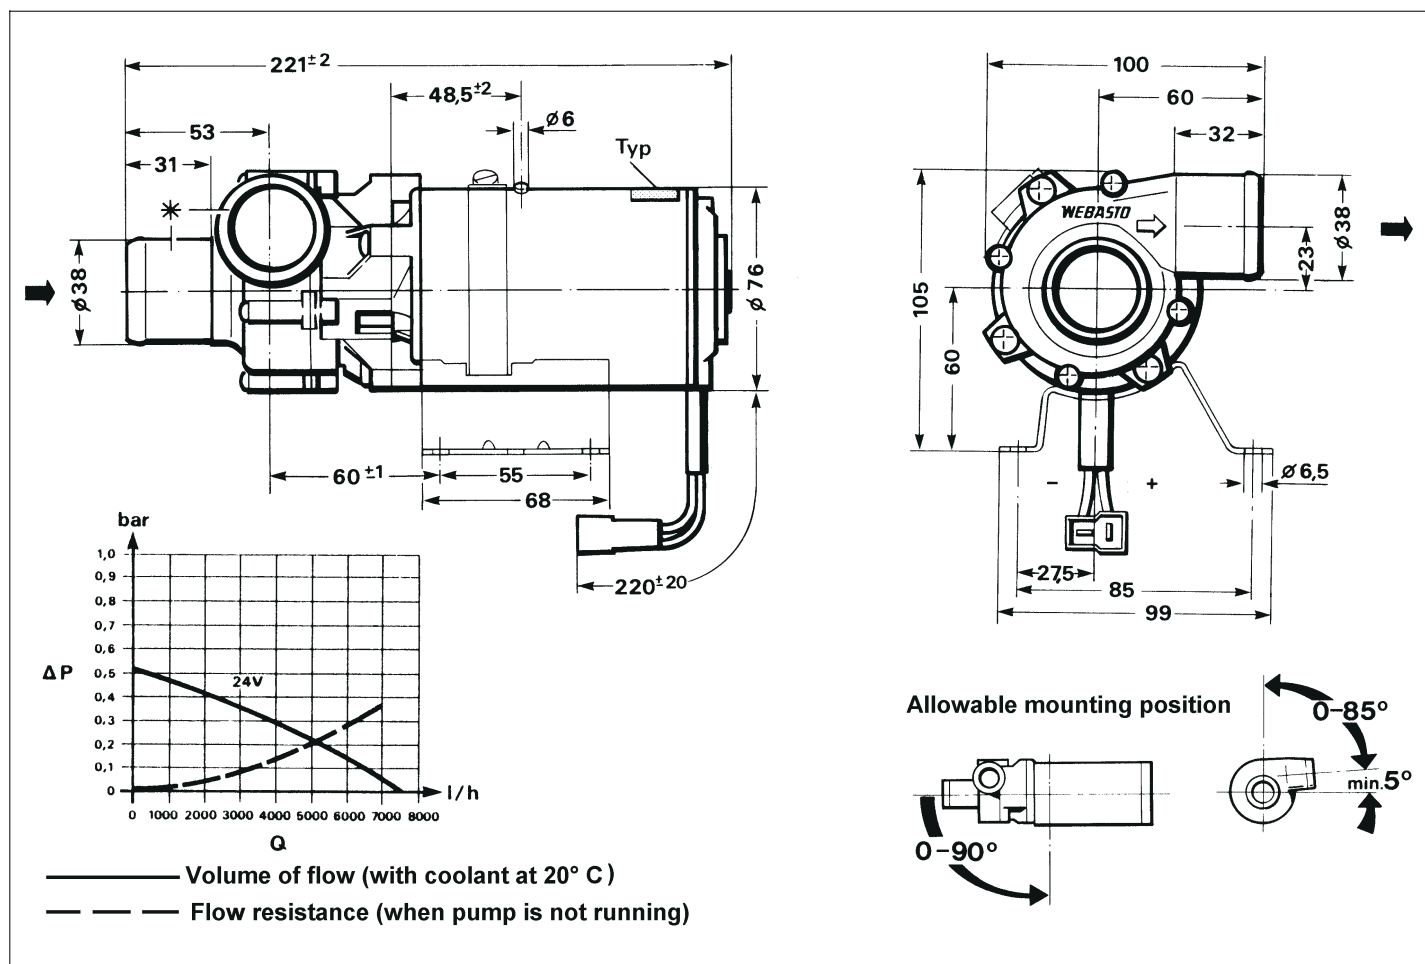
Coolant Circulating Pump Assembly - U 4814
